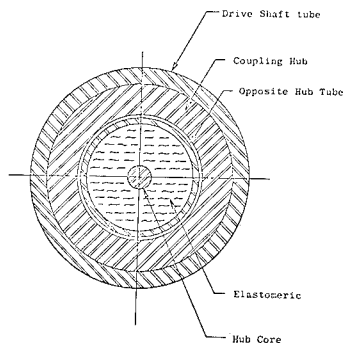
Section view of proposed ZTS coupling dampener configuration
